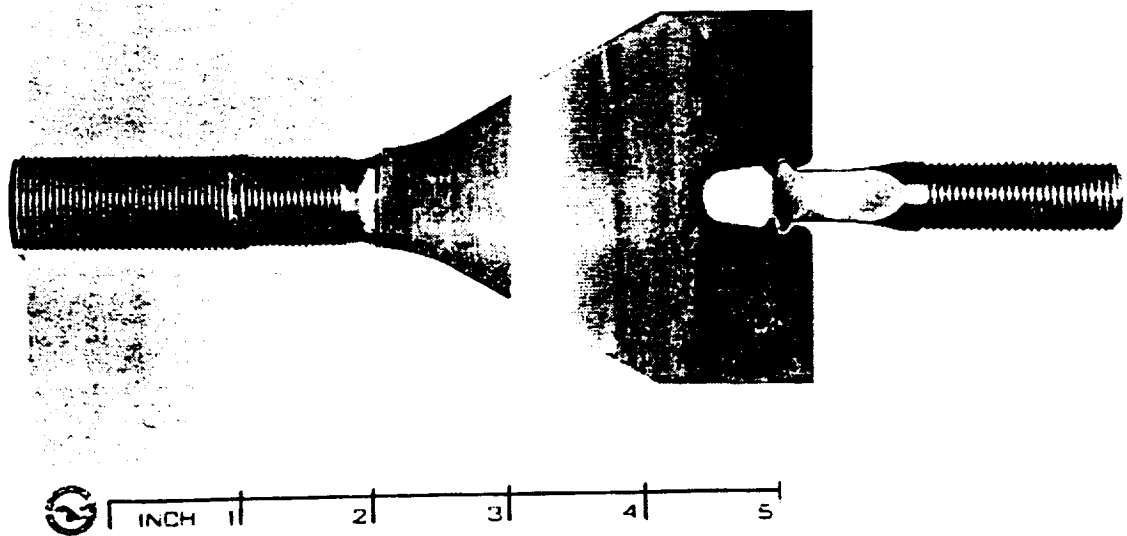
A Single Tooth Firtree (STFT) Specimen In a Broach Block Fixture
